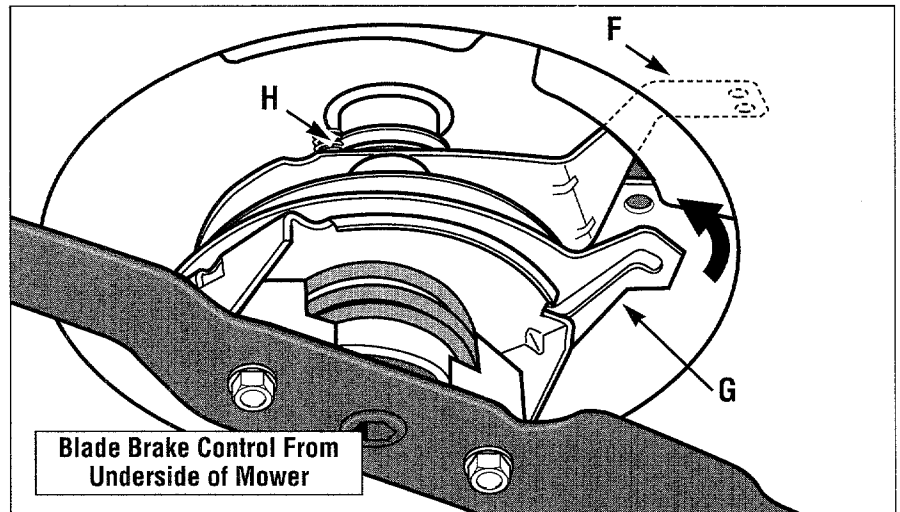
Rotate Blade Brake Control arm and plate for belt installation.
